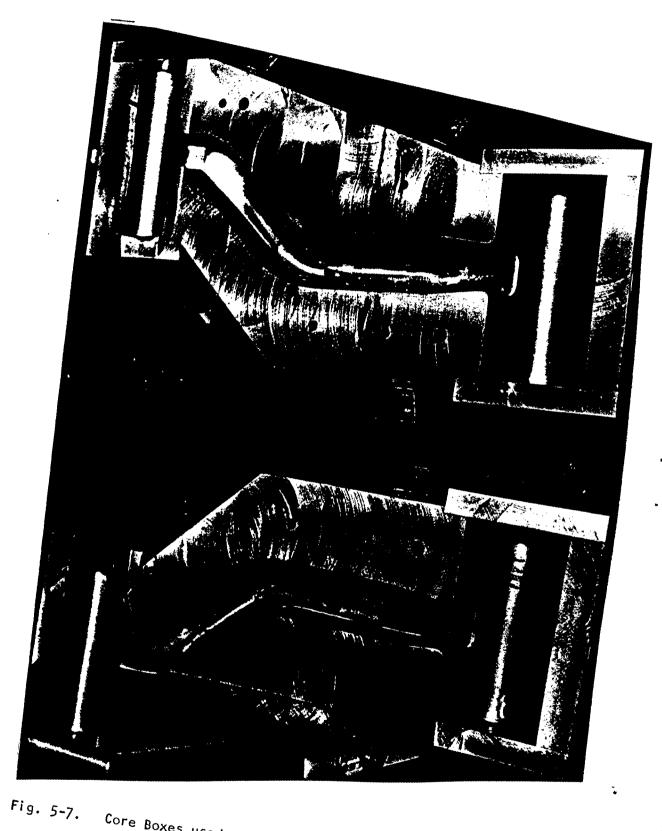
Core Boxes used to Produce The Road Wheel Arm
